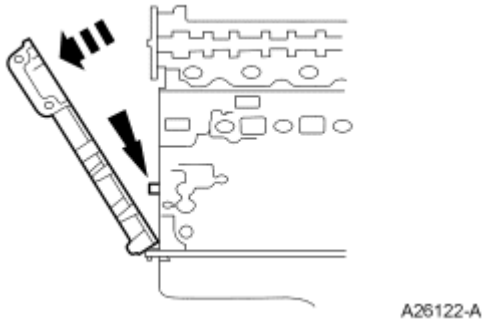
Removing Engine Front Cover From Front Cover-To-Cylinder Block Dowel
